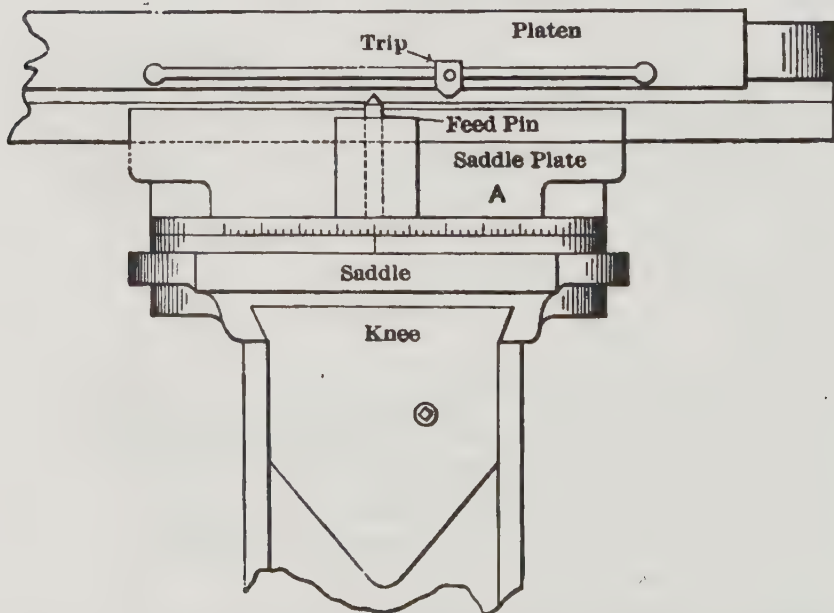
Construction of Universal Milling Machine (Brown & Sharpe.)
